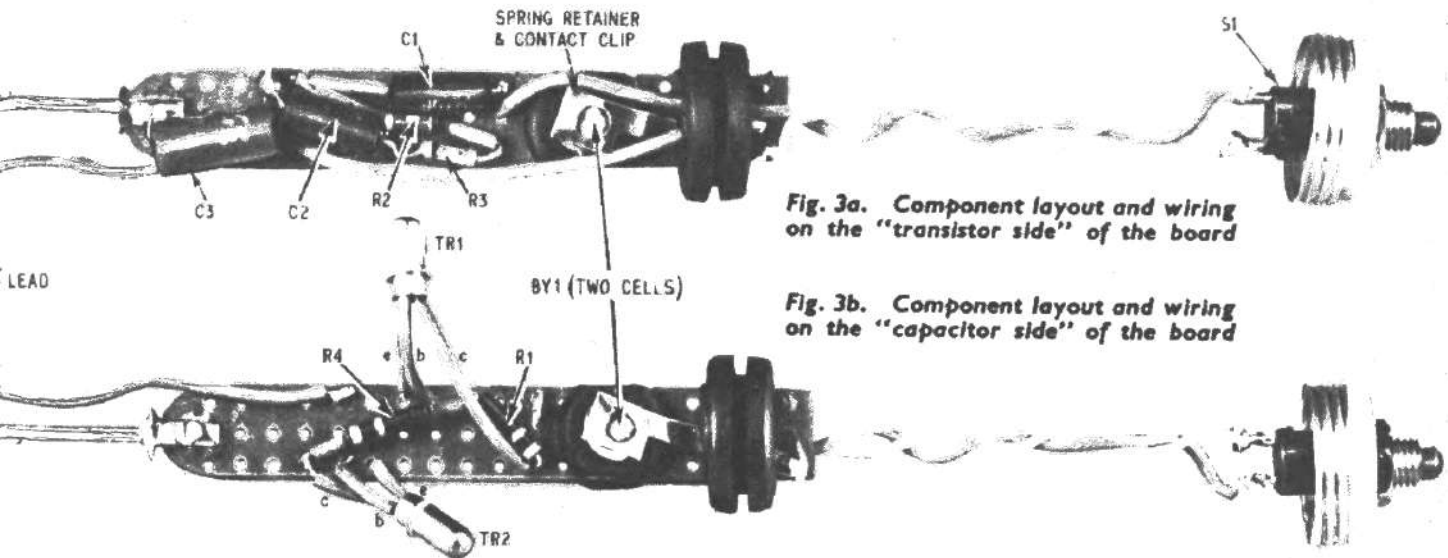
Component layout and wiring on the "transistor side" of the board
